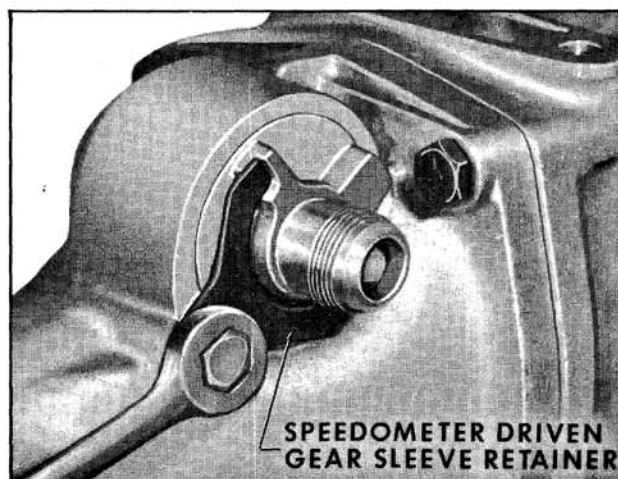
Removing Speedometer Driven Gear Retainer
